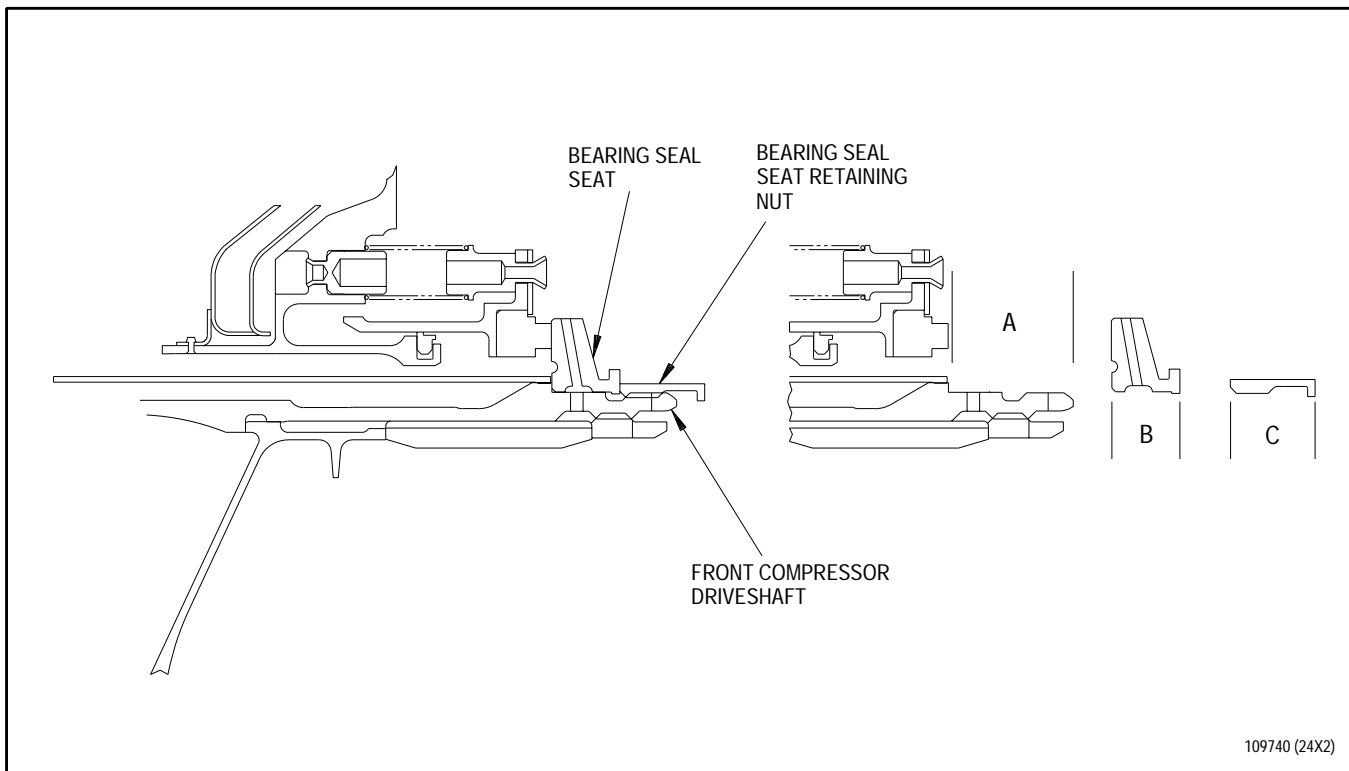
A. No. 5 Bearing - Measurement Of Parts Before Installation
